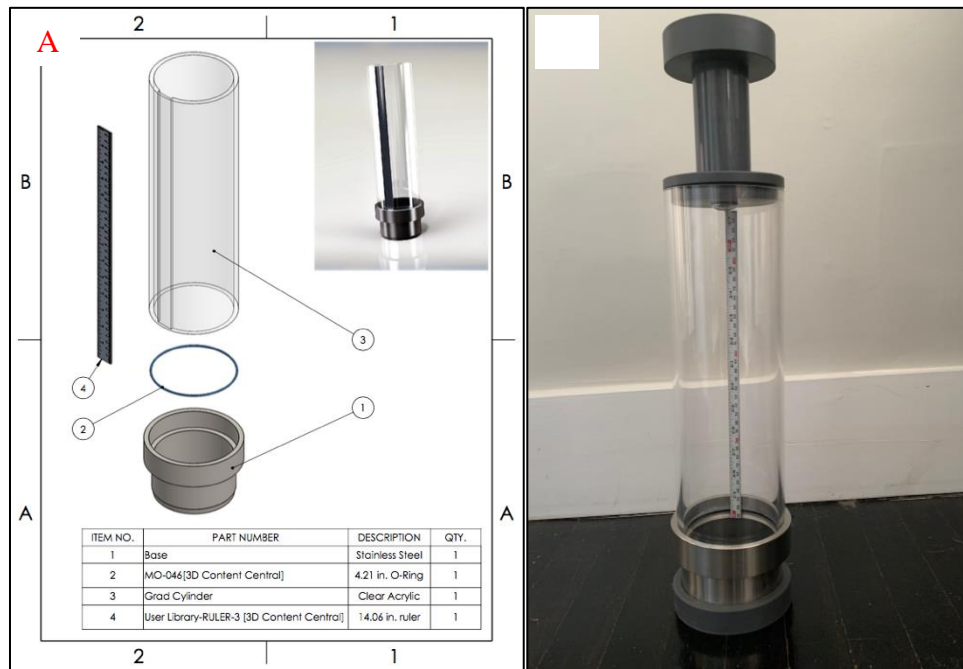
(a) MPD-I SOLIDWORKS design drawing and (b) device constructed in Georgia Tech's Civil Engineering Machine Shop.
